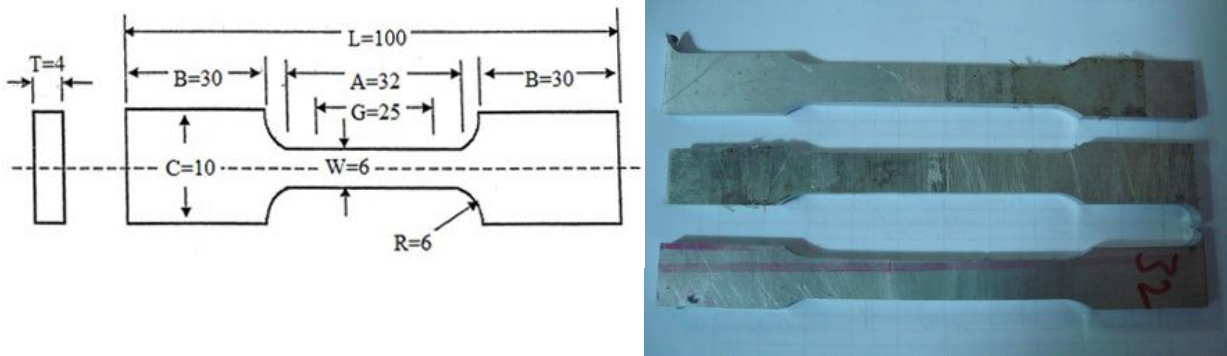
Rectangular tension test specimen ,ASTM,2005.
